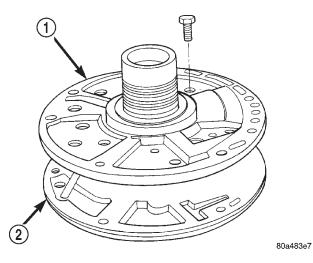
Pump Support Bolts 1 – REACTION SHAFT SUPPORT 2 – PUMP
